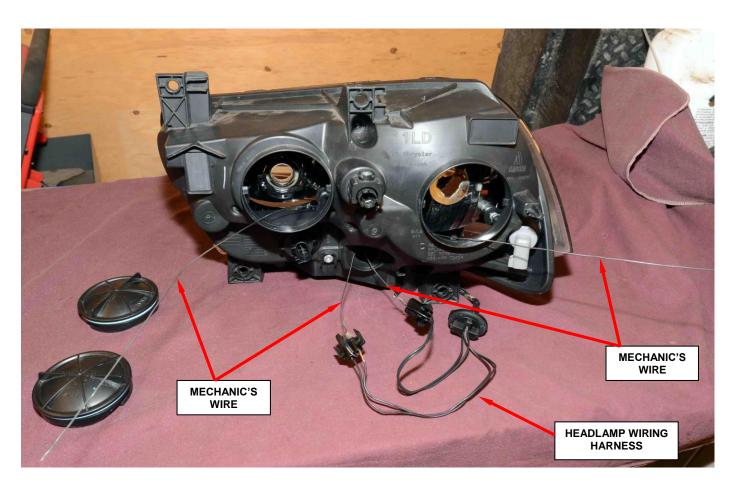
Remove Original Headlamp Wiring Harness from Headlamp Assembly
